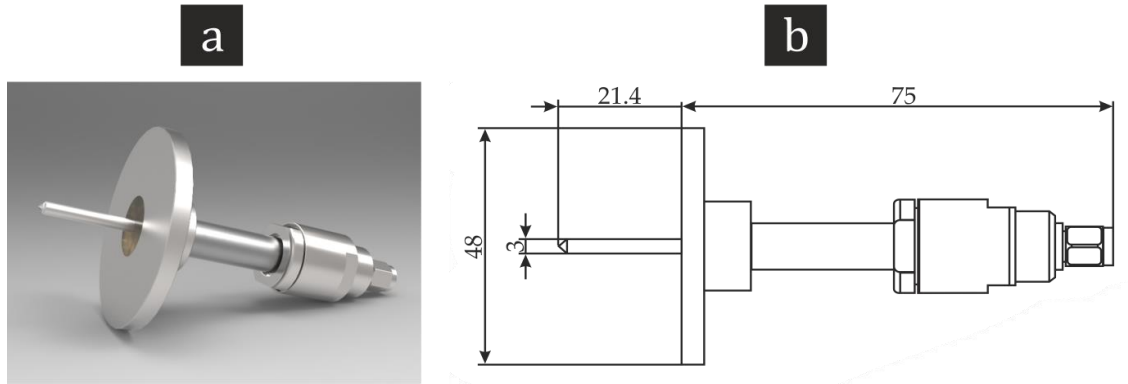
a) Prototype of the tested probe. b) Respective dimensions of the probe (in mm).
